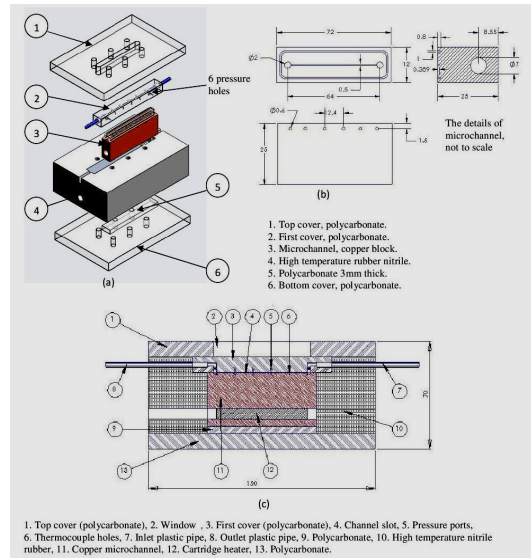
Test section schematics identifying main components; (a) exploded view, (b) the detail of microchannel dimension, (c) axial view of test section, Mirmanto et al. (2012).
